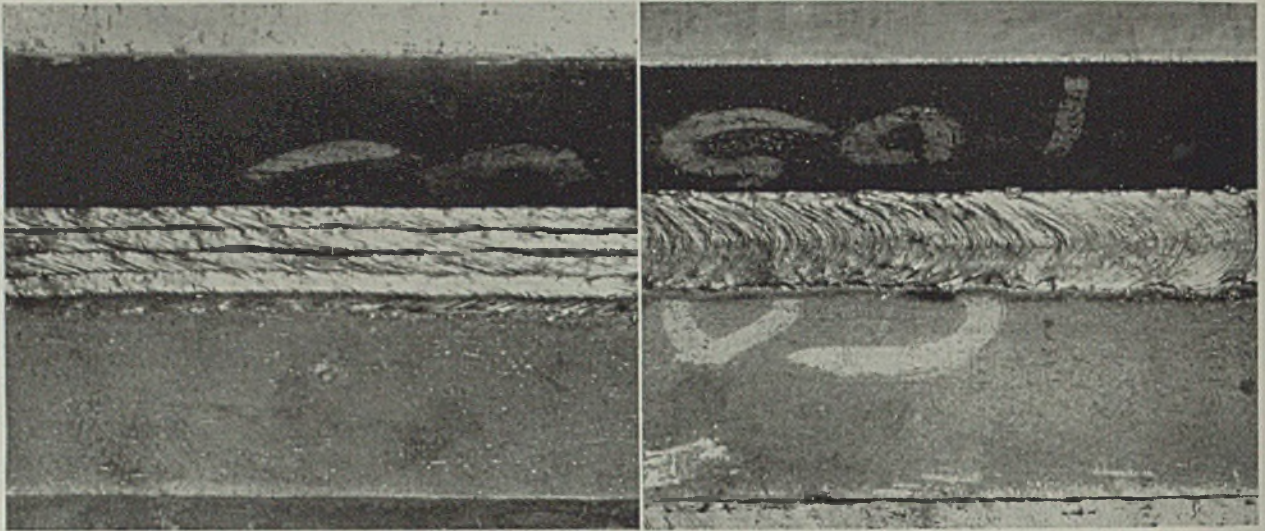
(Left)—Horizontal fillet weld made with a general-purpose electrode. Fig. 3. (Right)—Flat-position fillet weld made with downhand electrode. Note all welds shown here are fillet (corner) welds in 1-inch plate
